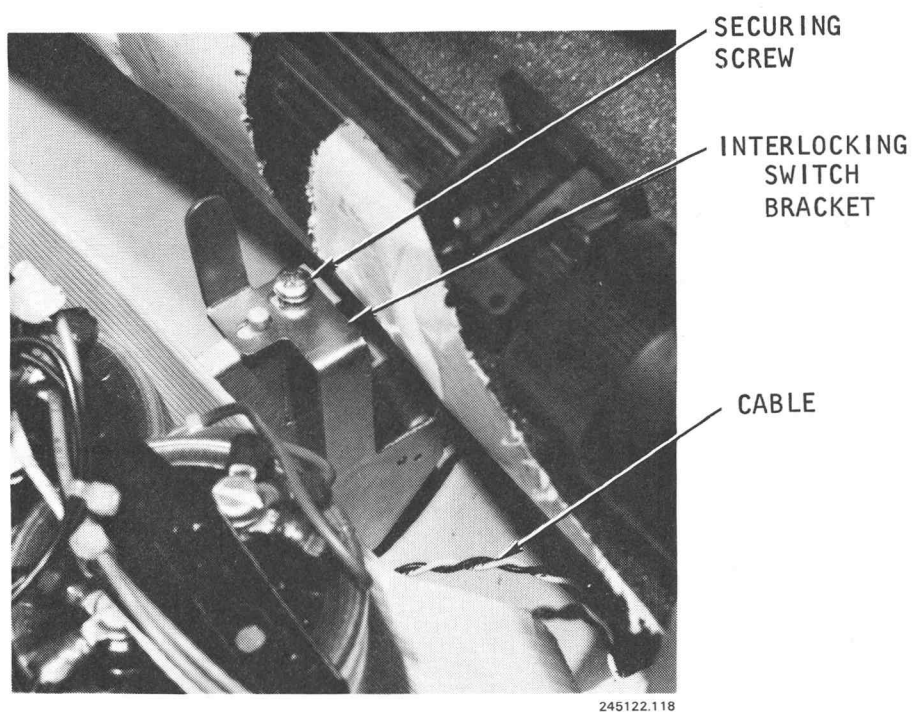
Paper Low Switch Interlock Assembly Removal/Replacement
